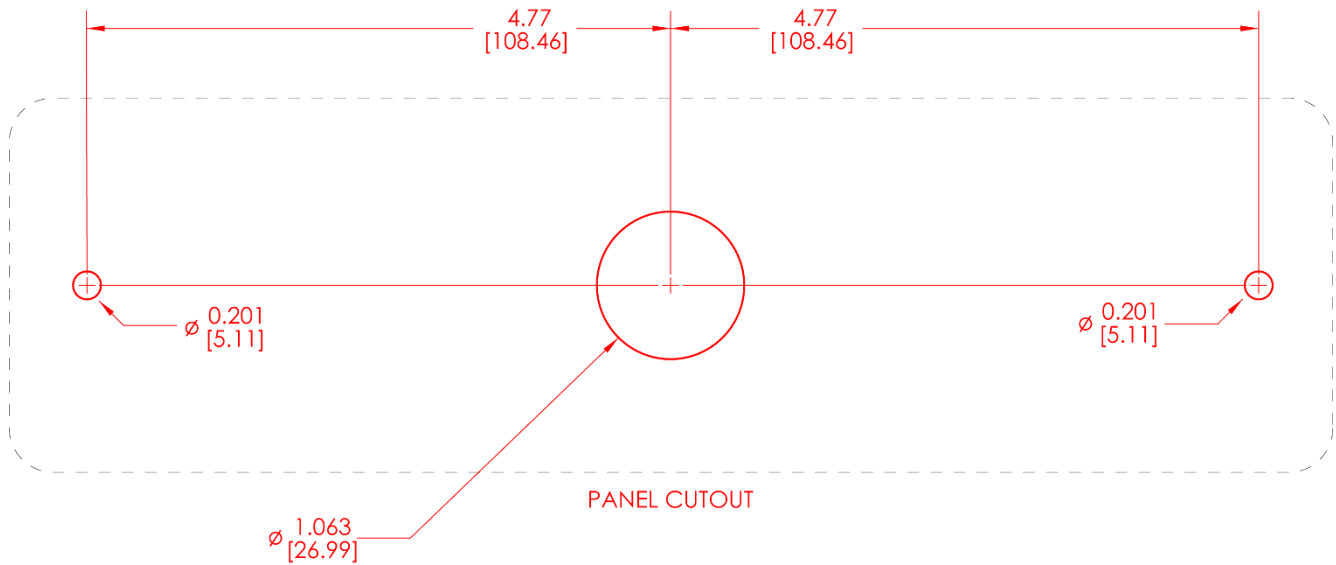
SmartTOUCH, 16 position installation dimensions in inches [millimeters].
